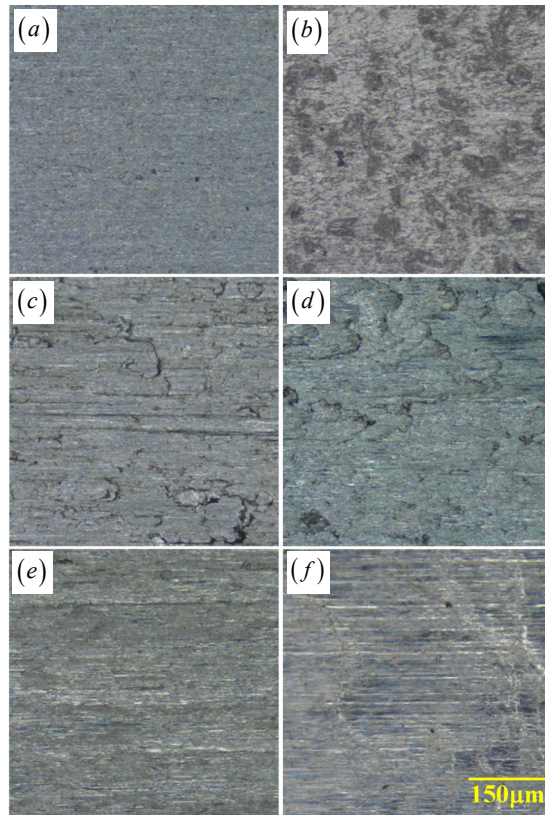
Optical microstructure of the surface before machining (a) 0.2Si alloy, (b) 17.9Si alloy and surface generated due to machining at 1 mm depth of cut and 17.9 m/min cutting speed under up milling (c) 0.2Si alloy (d) 17.9Si alloy and under down milling (e) 0.2Si alloy (f) 17.9Si alloy
